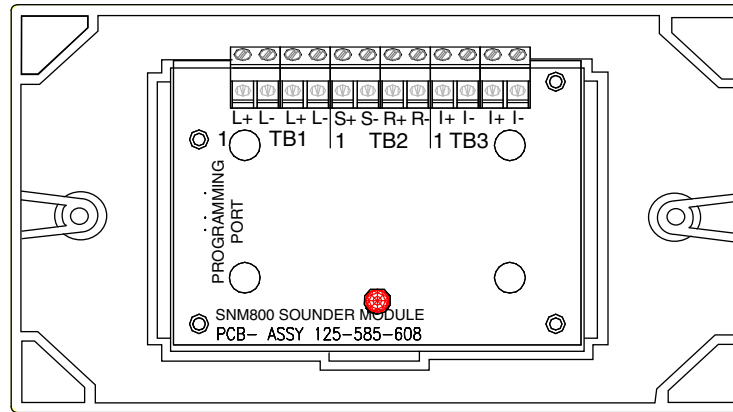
SNM800 Facia Plate (rear view) showing location of PCB
